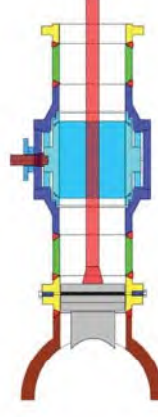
Feed alignment check of customers hot tap weld branch assembly
